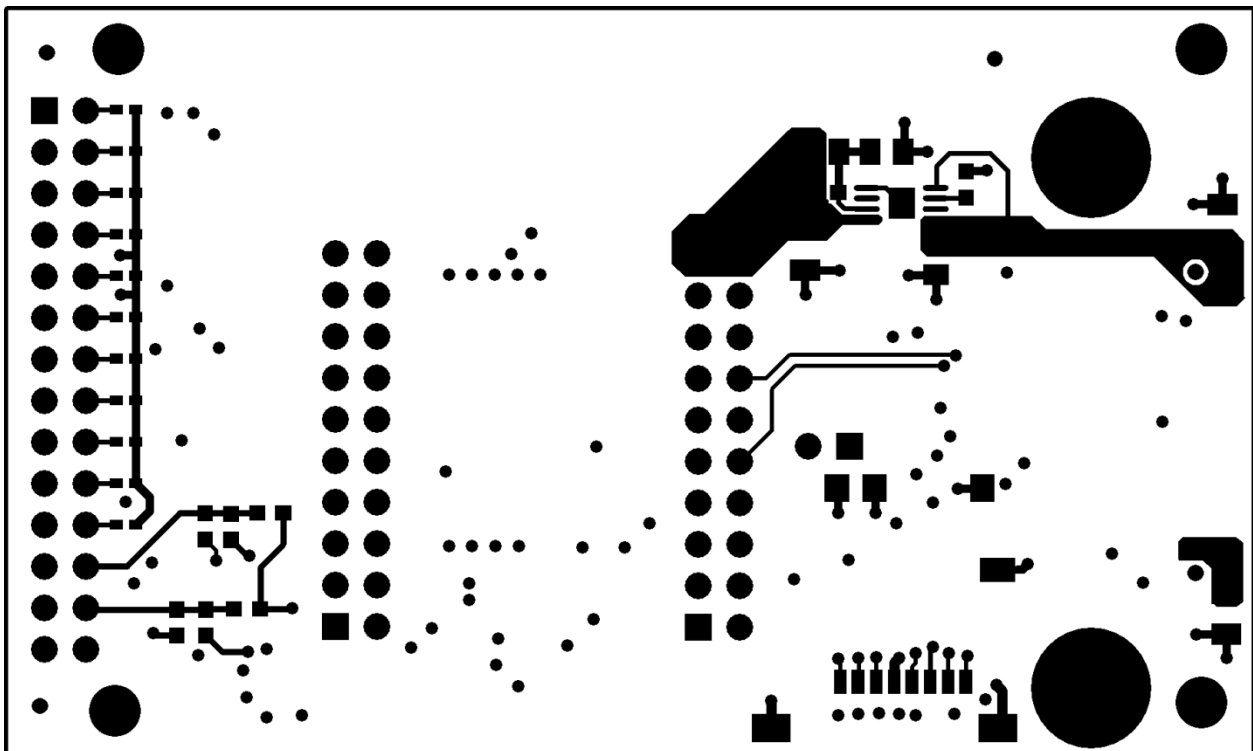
TLV2553EVM PCB Layer 4: Bottom Layer
